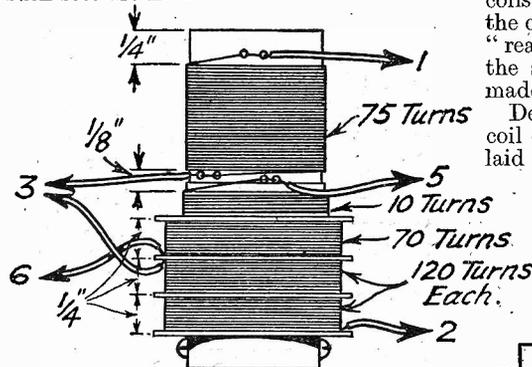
Constructional details of the oscillator coil described are given in the above drawing.
